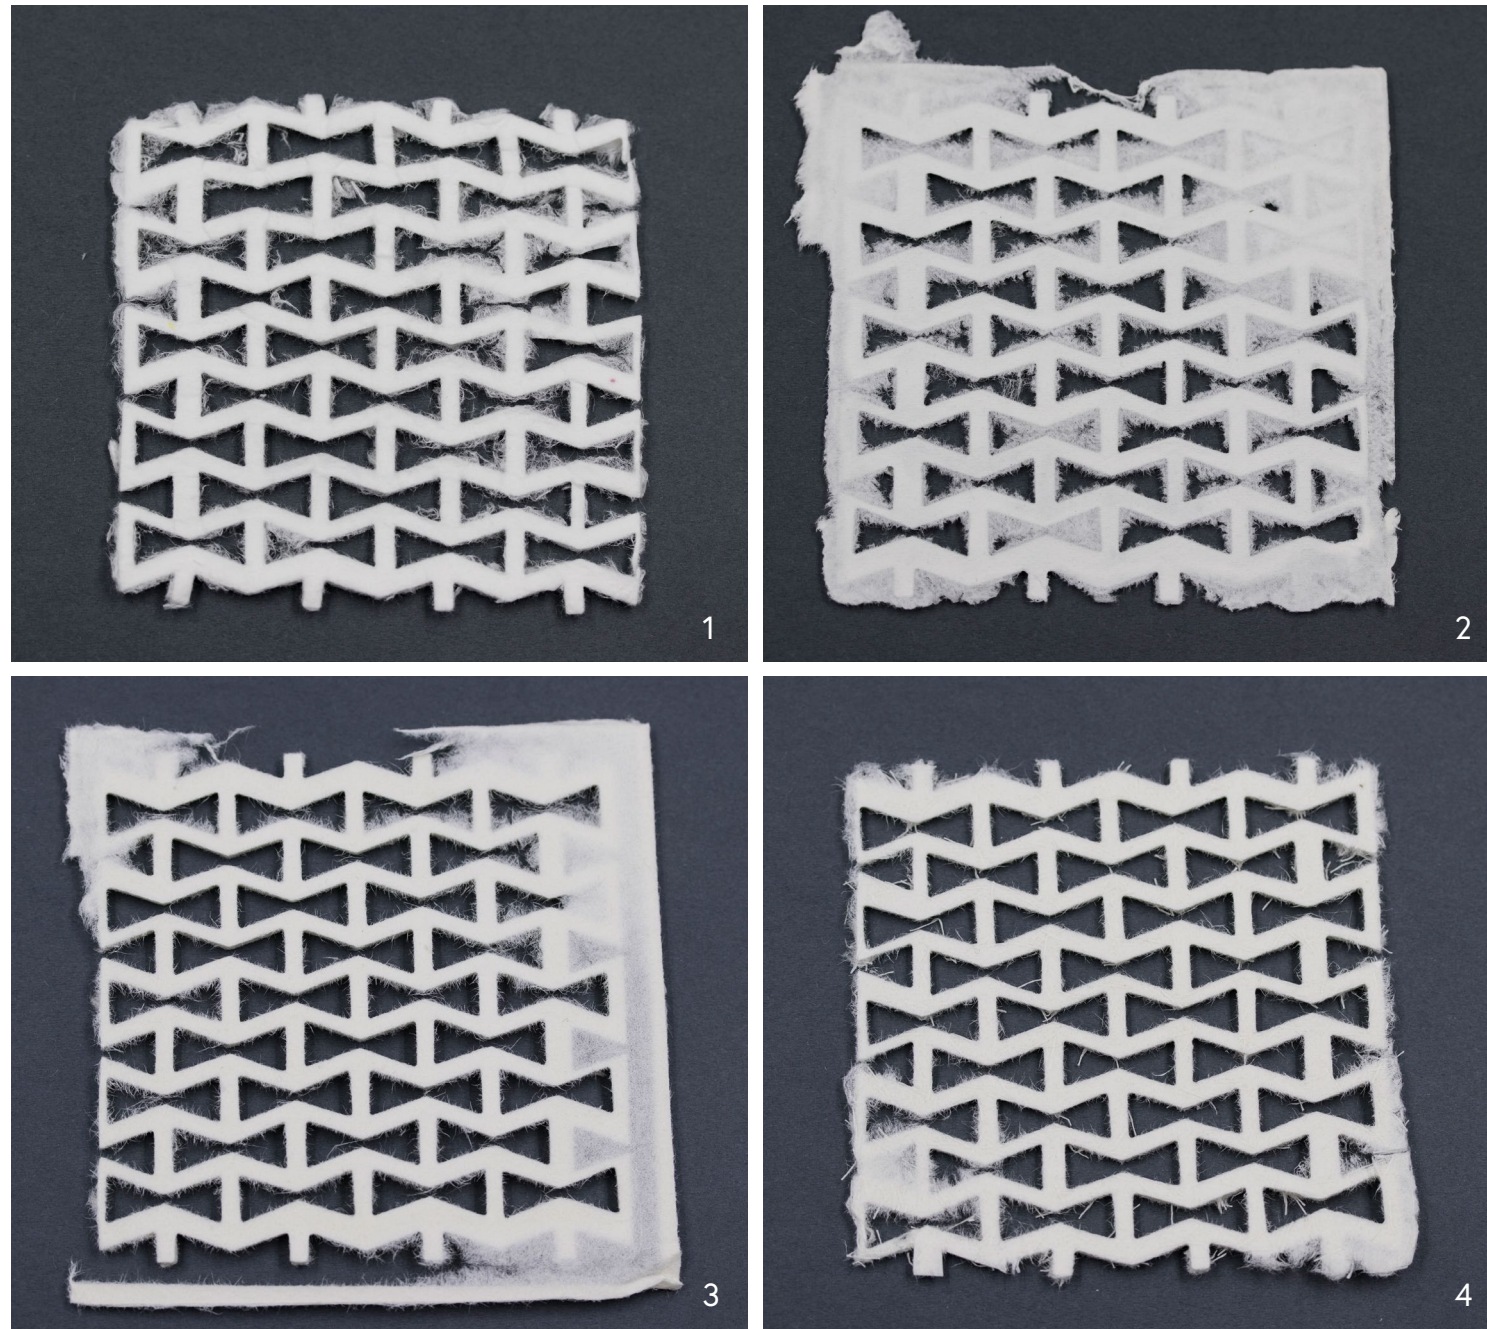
Foam-formed samples produced with four fibre furnishes.
